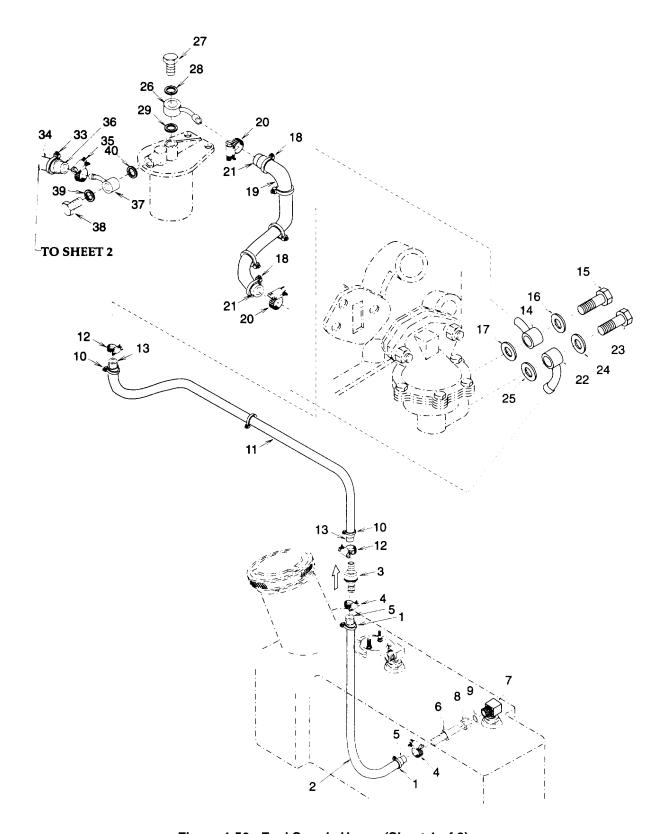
Fuel Supply Hoses (Sheet 1 of 2)
